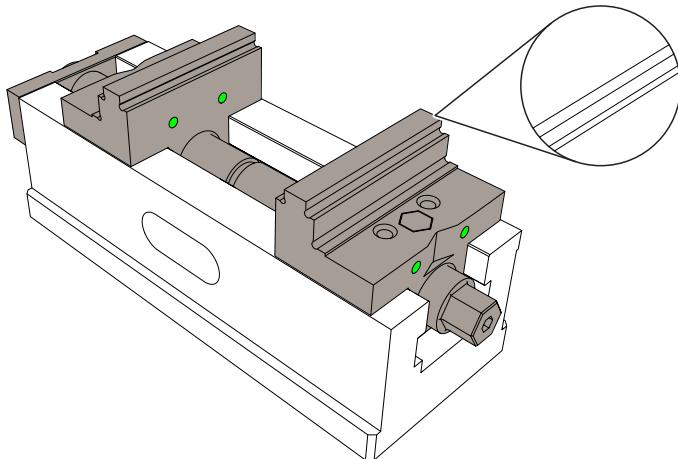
Clamping jaws for conventional clamping with a smooth surface
